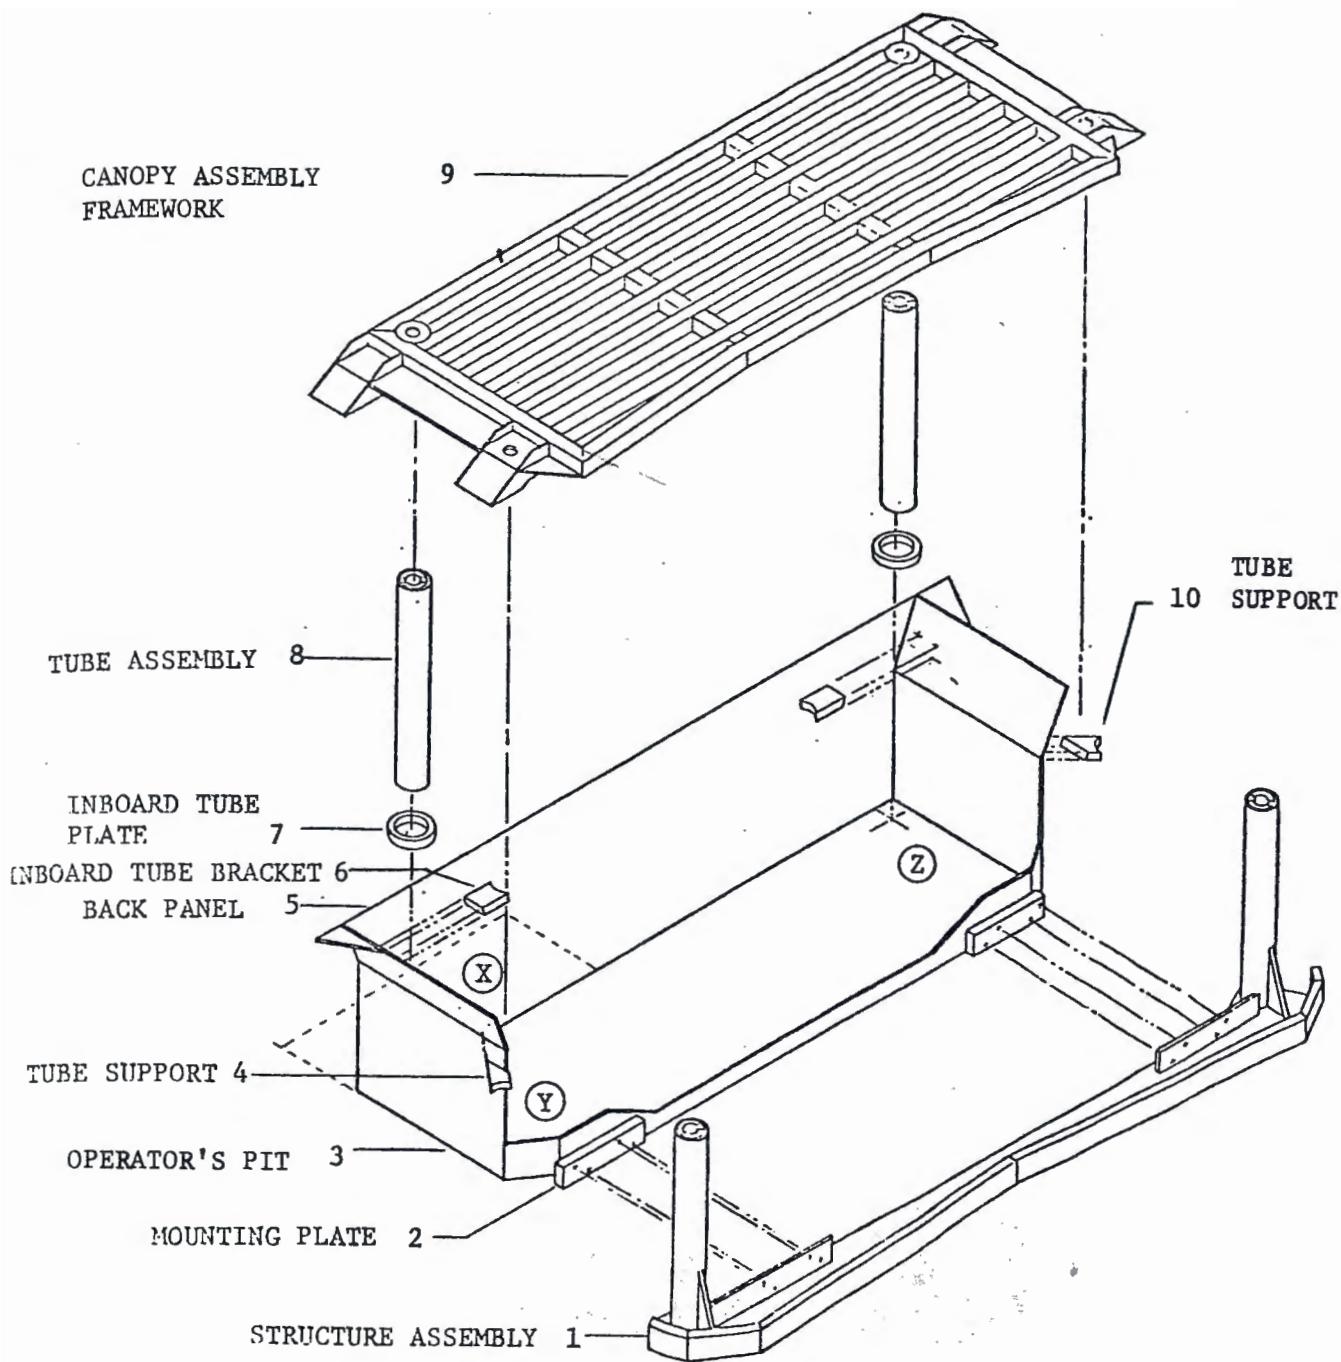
Skeleton Exploded View of Shuttle Car Protective Canopy
